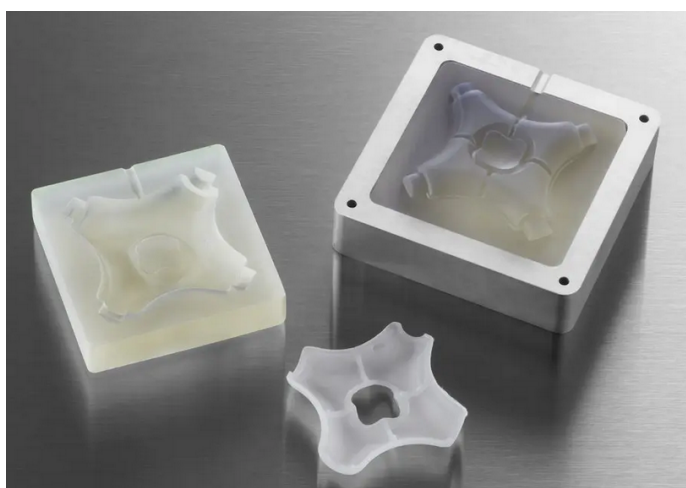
3D printed injection moulds in an aluminium frame with the finished injection moulded part. [16]
